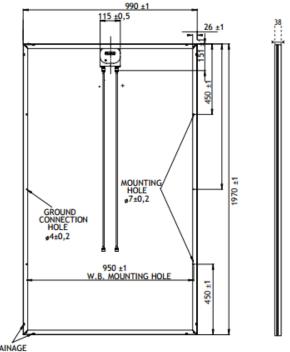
Mechanical drawing of the SLG/SSG module showing the mounting holes, the drainage holes, and the ground connection holes
